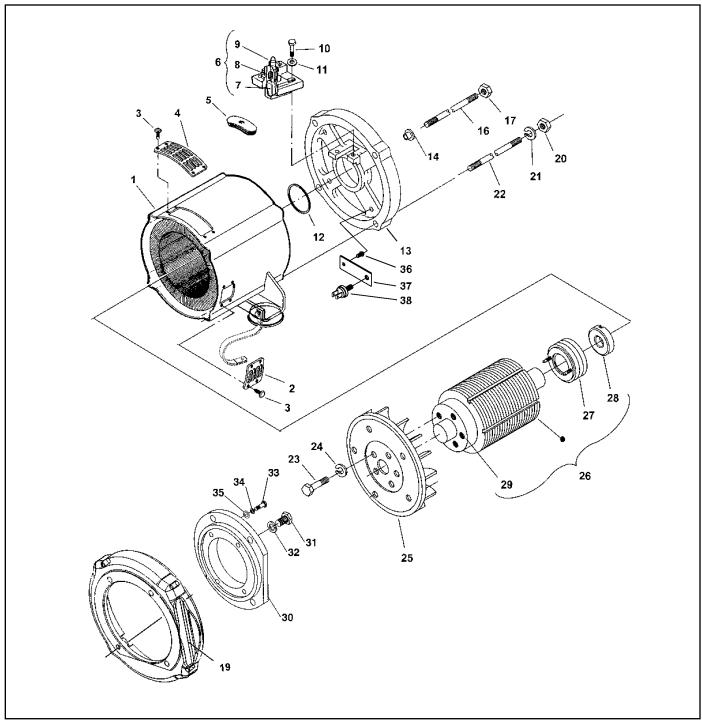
GENERATOR DISASSEMBLY/REASSEMBLY
